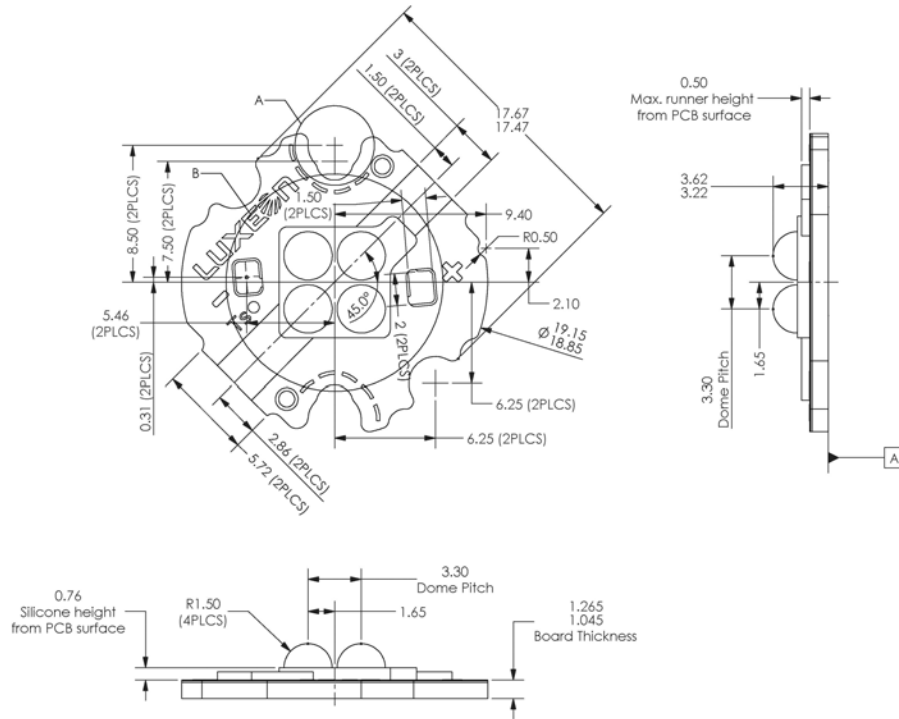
Mechanical Drawings for LXKx-PWxx-0404
